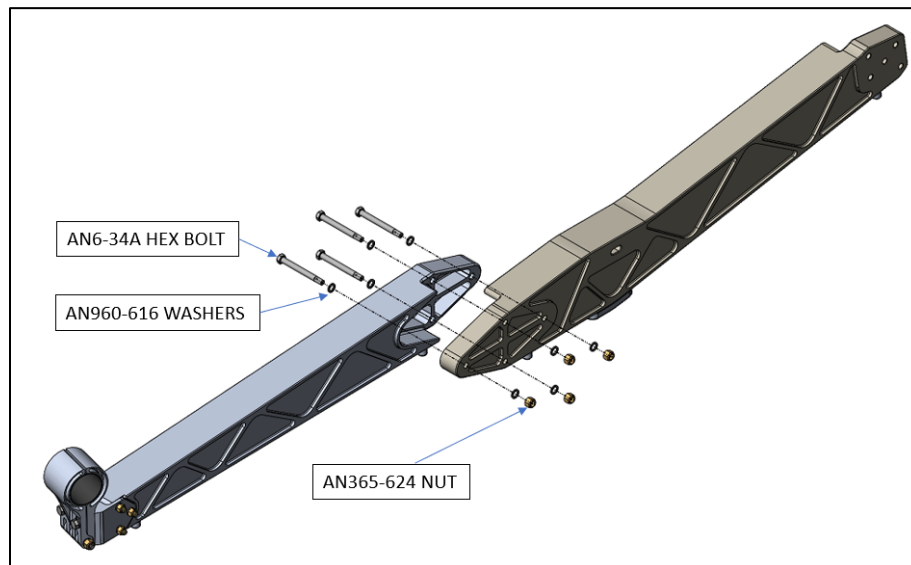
Assembly of the AFM-505-10-001 Fwd Main Beam to the AFM-505-10-003 Aft Main Beam.
